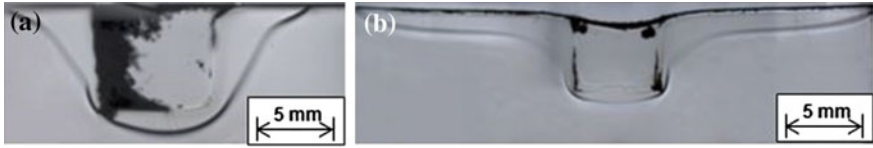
Backlight images of Friction stir welded PMMA (transparent in nature) a Tool 1 b Tool 2 [50]
